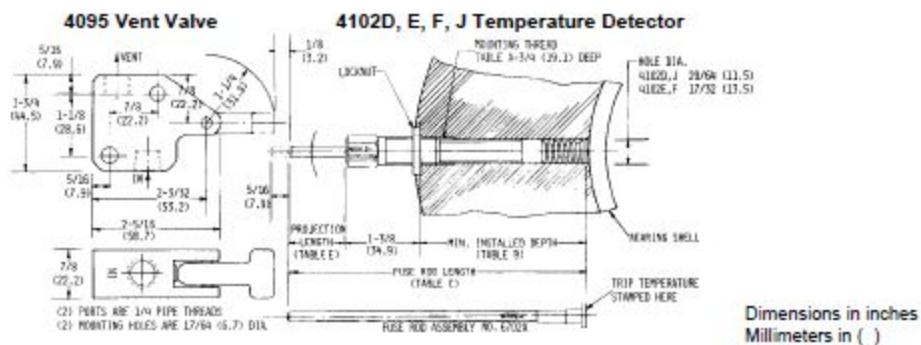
illustrates the general method of installing Model 4102 in a moving part. An AMOT 4095 Vent Valve is mounted on a bracket near the Fuse Rod tip. If possible, the vent valve should be installed above the oil level in the sump. This makes visual checking possible and aids in manually resetting the valve when hot. This type of installation further prevents the possibility of a "drag" effect tipping the vent valve lever when the fuse rod tip passes in very cold oil. Normally, a 1/8" gap is left between the valve trip lever and the fuse rod tip. When the 4102 trips, the extended rod will strike the vent valve handle on the next pass and initiate the alarm or shutdown sequence.
